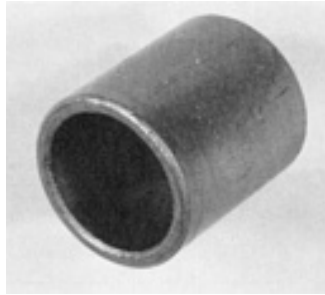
Clutch lever bearing. Composed of 90Cu-10Sn bronze. Weight: 20 g (0.05 lb). Secondary operation: oil impregnation
